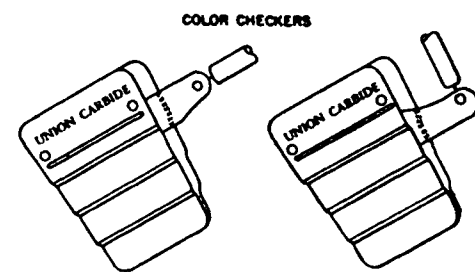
PERFECT PIECES WERE MADE BY ENTERING THICK SECTION FROM SIDE WITH GATING SHOWN
